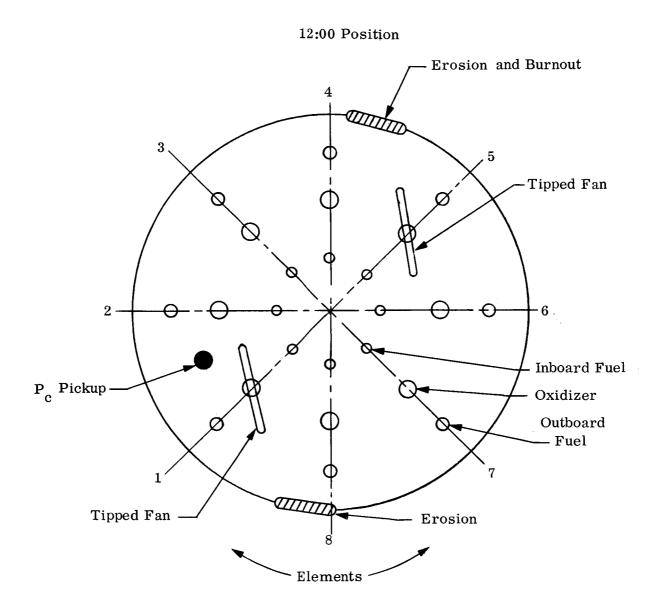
Injector S/N 2-C Water Flow Impingement After Fire Test of Engine Assembly S/N 2
